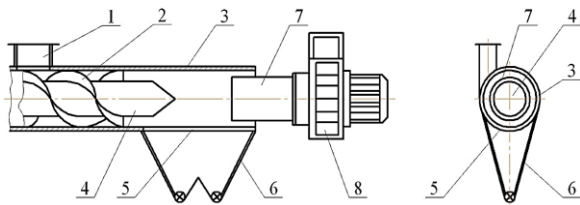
Constructive scheme of cyclone dust collector: 1 – tangential pipe; 2 – screw swirler; 3 – cylindrical case; 4 – insert; 5 – tangential gap; 6 – dust collection chamber; 7 – exhaust air duct; 8 – exhaust fan.
